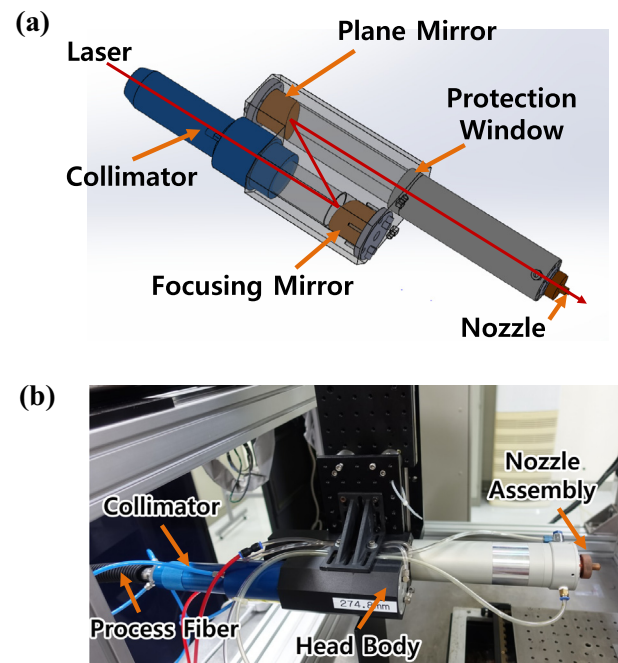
The developed cutting head: (a) the designed scheme and (b) the view of the cutting head installed on the X-Y-Z stage.
